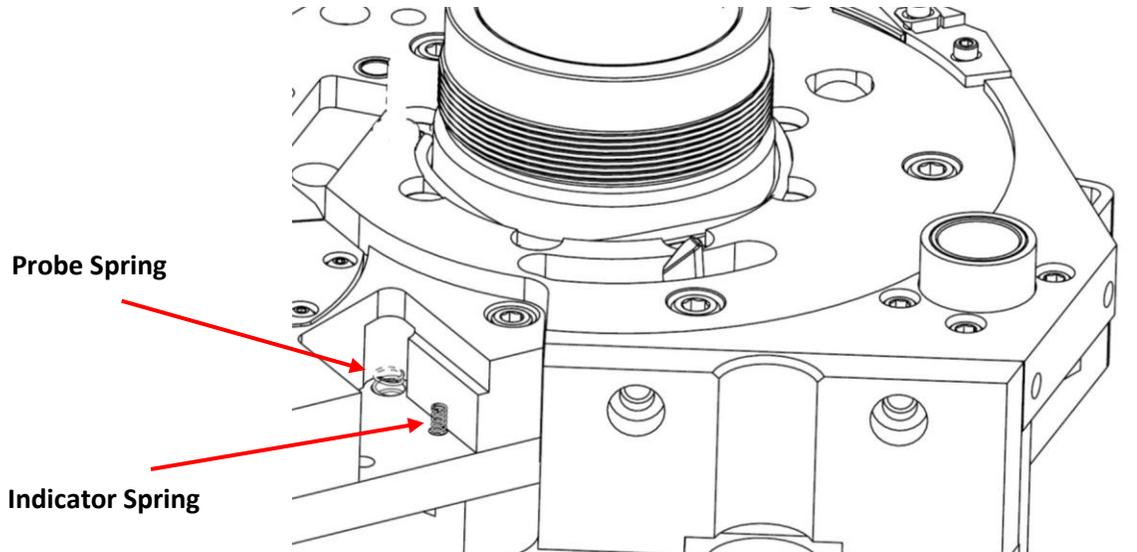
Place Probe Retractor and Indicator Springs in Spring Pockets as shown.
